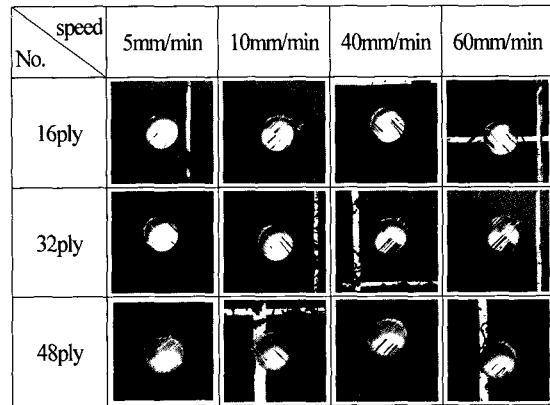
Photograph on exit side of drilled specimen (ϕ : 8mm, rpm: 1500)
